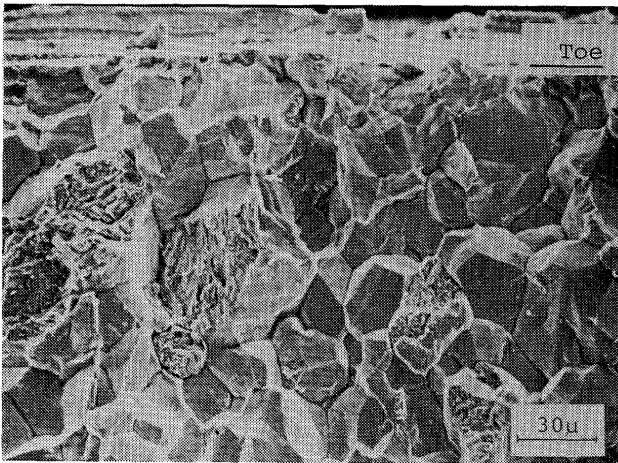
Toe cracked surface occurred in SAE4340 steel welds. thickness; 25 mm, electrode; D5016 (hydrogen; 4 cc/100 g), heat input; 25,000 J/cm, non-preheating, water quenched just after welding
